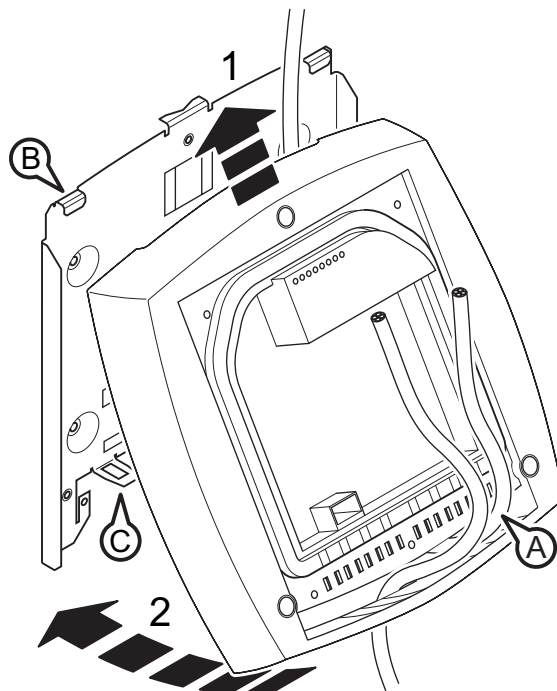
Fitting the SCALANCE W786 to a mounting plate
